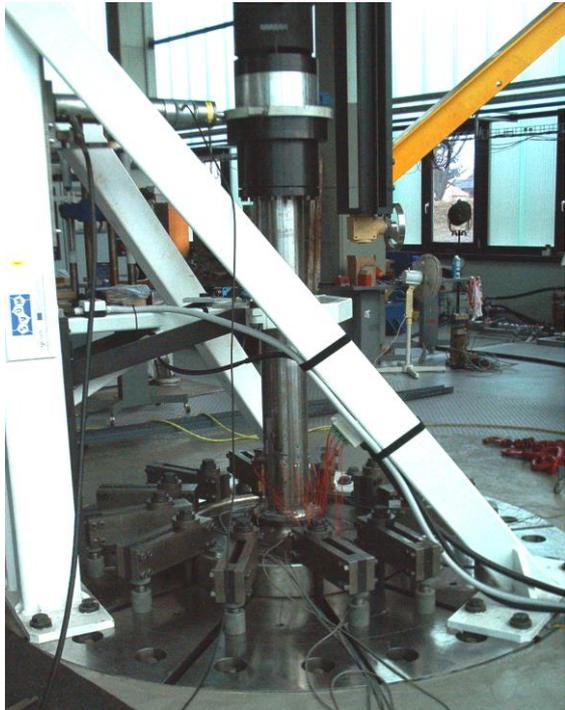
Total view of the axle prepared for fatigue test on the Sincotec machine
